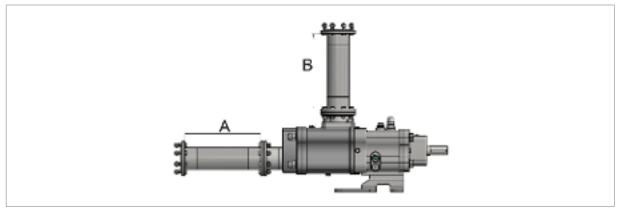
Use straight lengths of pipe upstream and downstream of the pump (recommendation)
